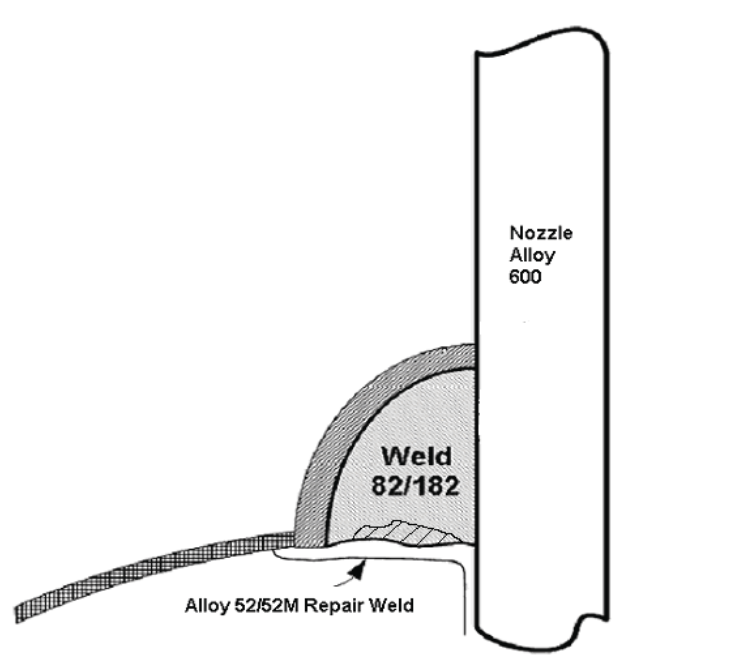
Schematic of Typical Repair Configuration for the Surface Flaw in the J-groove Weld
